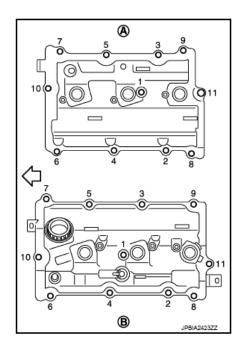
Rocker Cover Bolts Loosening Order Courtesy of NISSAN MOTOR CO., U.S.A.
